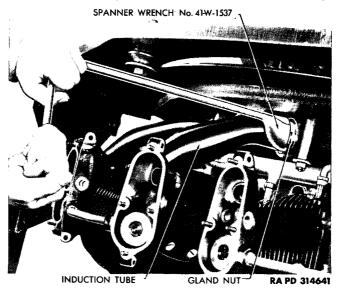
Removing Fuel Induction Tube Gland Nut 57
